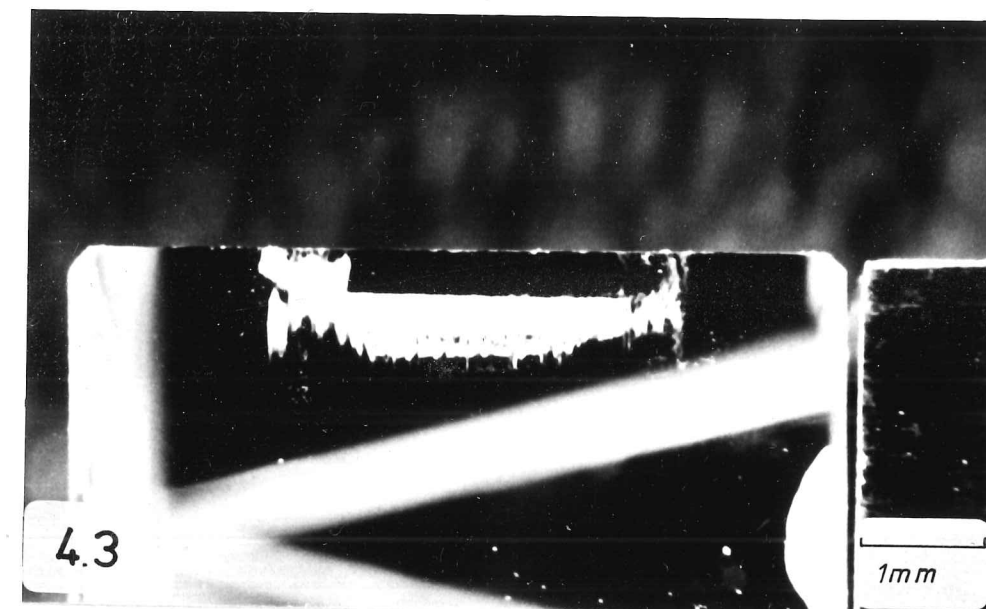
Lead chip produced in air with the transparent tool, showing the end of the chip after detachment from the tool.
